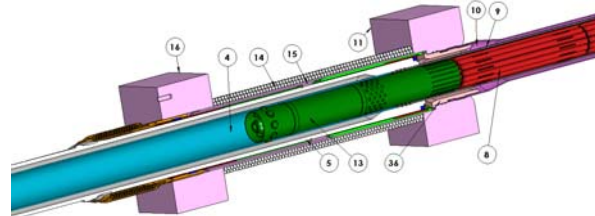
Schematic representation of the shield plug mounting inside of end fitting
